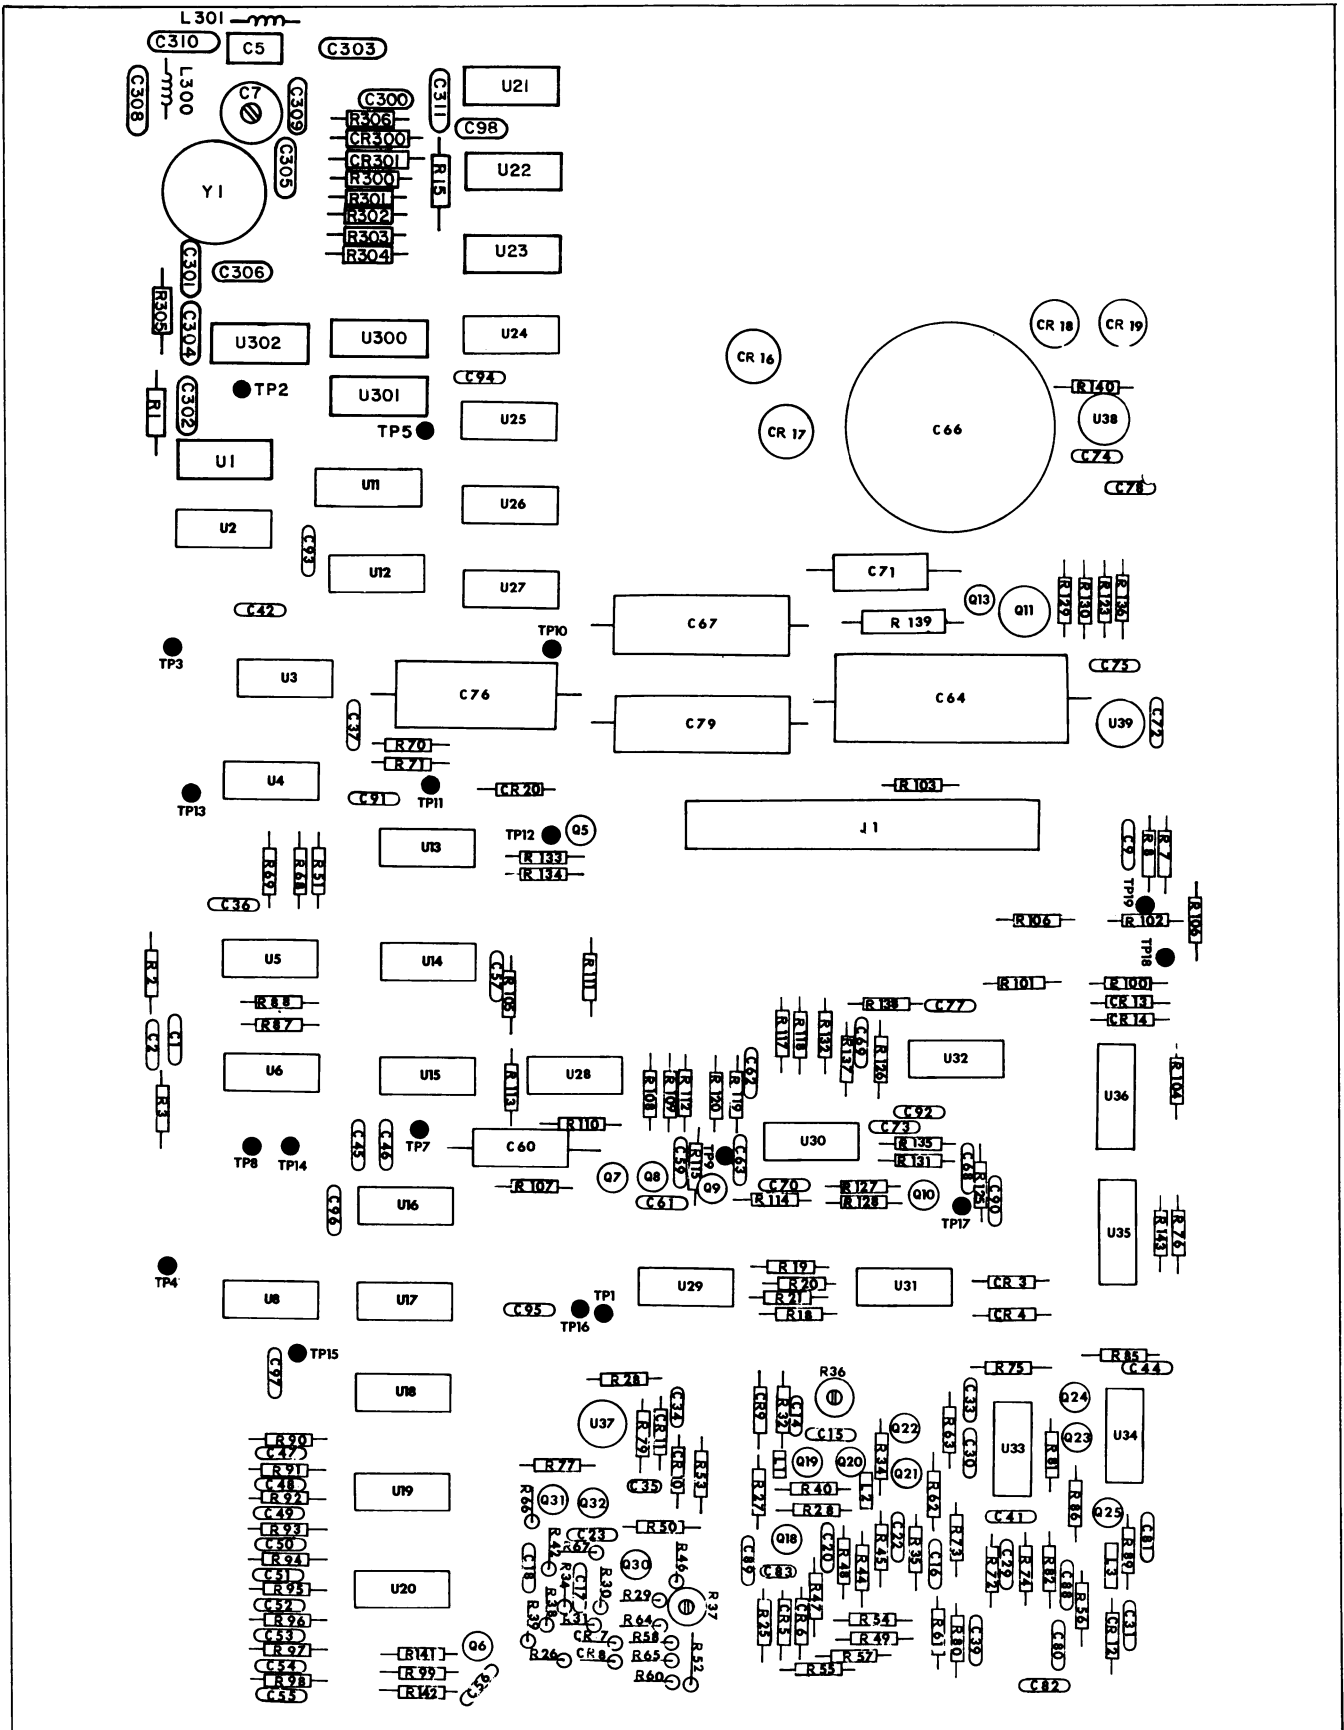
A. Motherboard Assembly A3 Component Locations (for Serial No. Prefix 030-)
